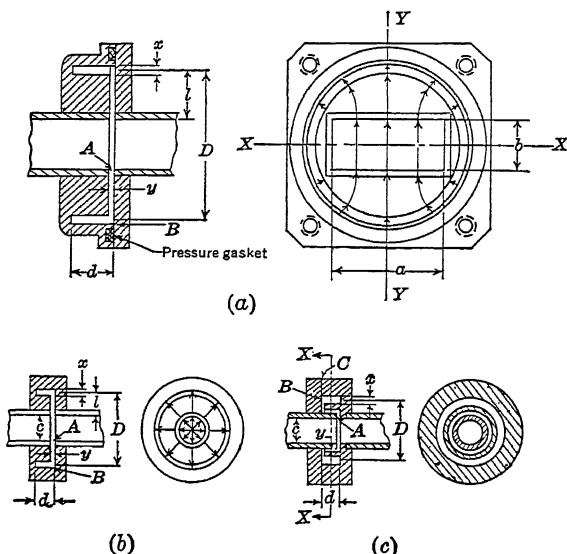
Choke-flange Couplings; (a) Rectangular Wave Guide; (b) and (c) Circular Wave Guide (Courtesy McGraw-Hill Book Co.)
